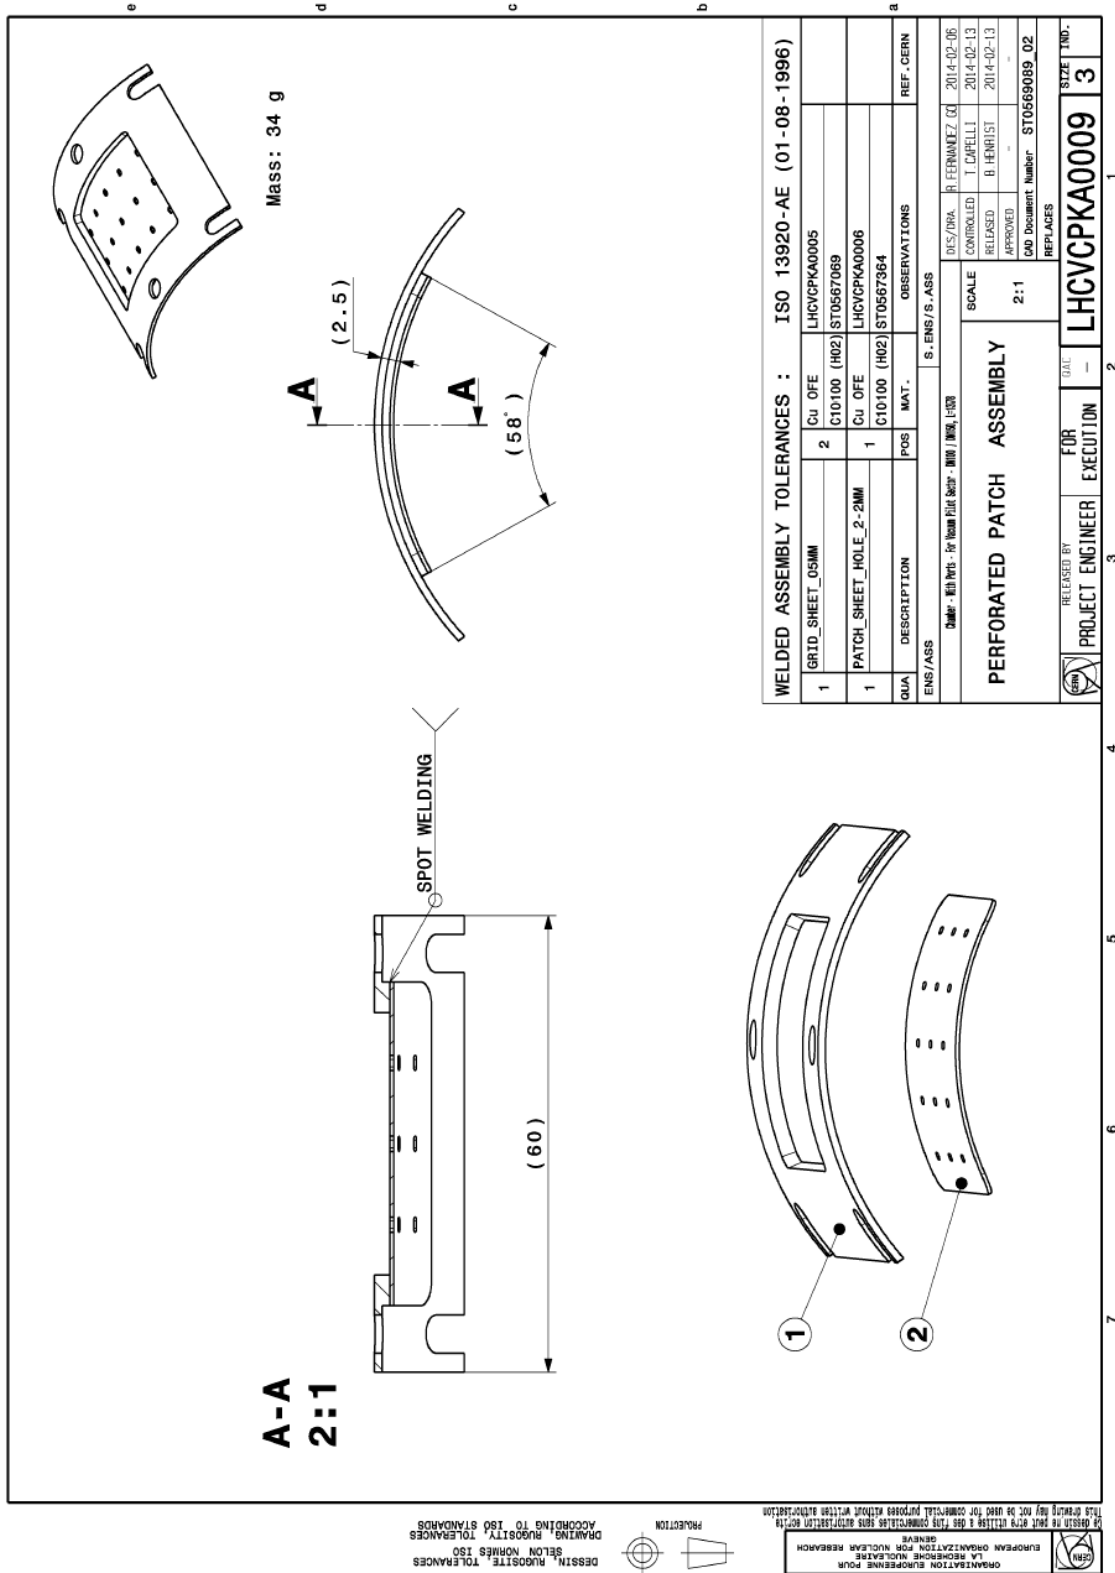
Grid and patch sheet assembly for shielded pickup: the grid is welded on the patch
